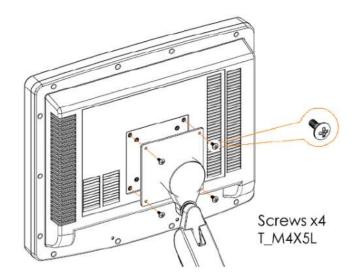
ARMPAC-6XX(AL) VESA Mounting
